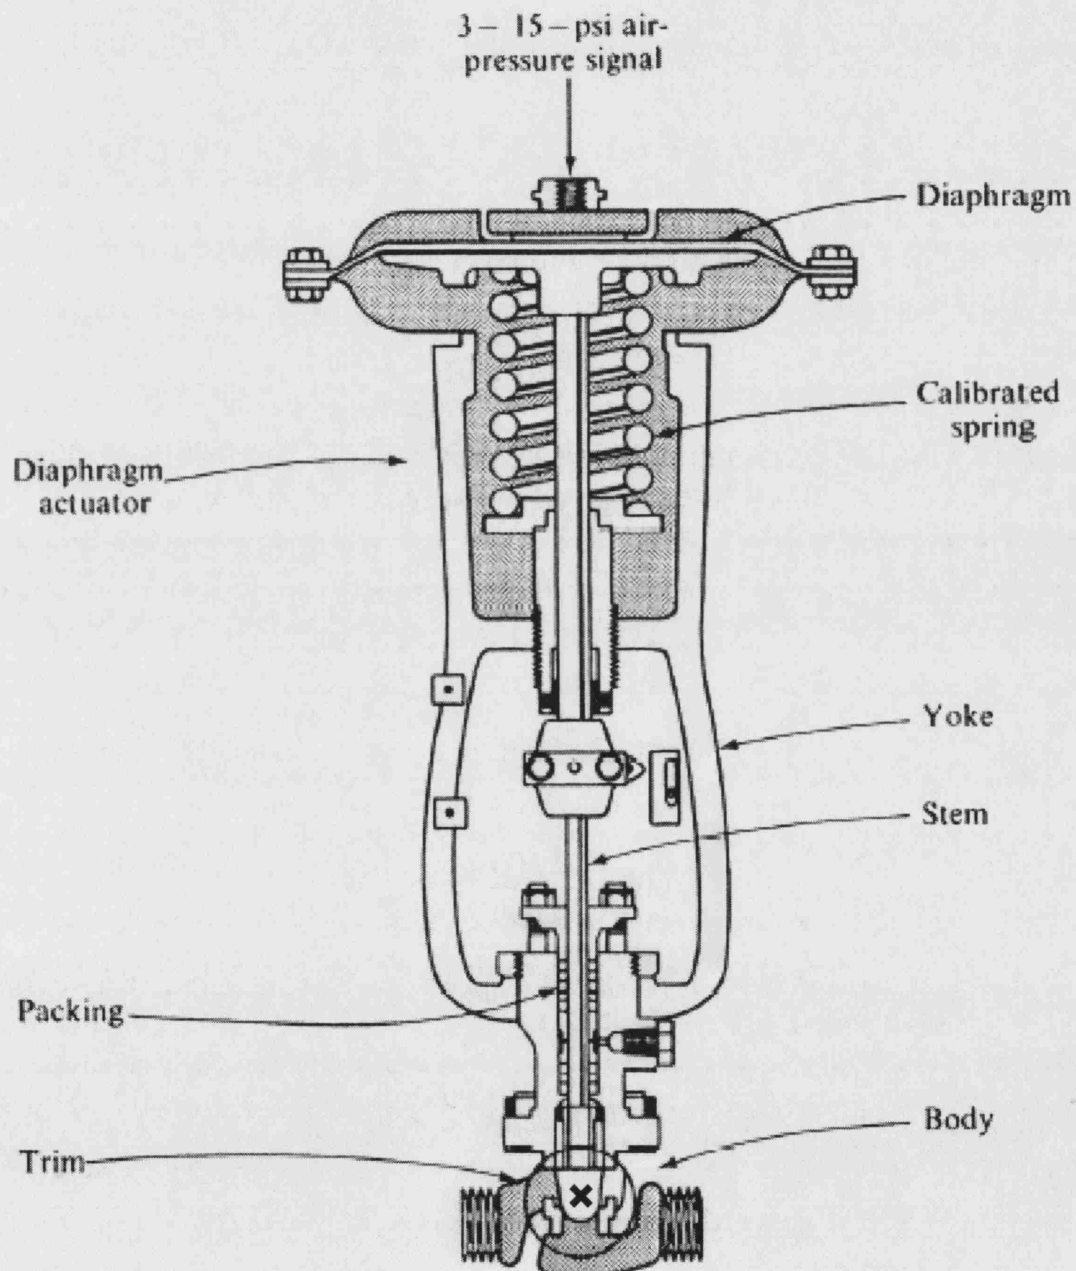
Drawing of a control valve. The point marked X indicates the valve plug.
